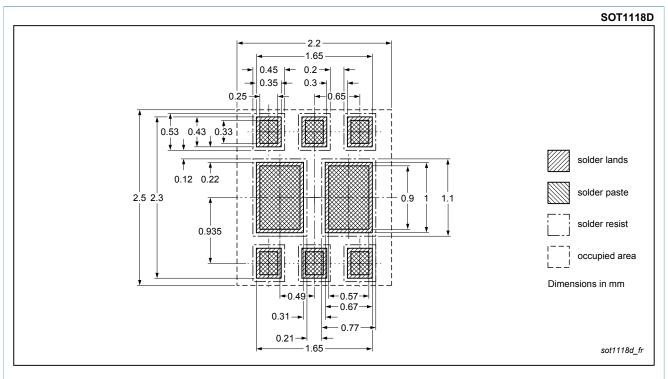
Reflow soldering footprint for DFN2020D-6 (SOT1118D)
